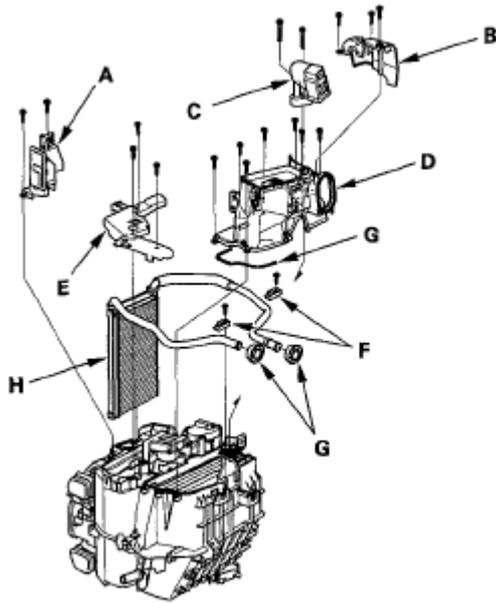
Identifying Passenger's Heater Duct, Expansion Valve, Heater Core And Heater Core Cover
